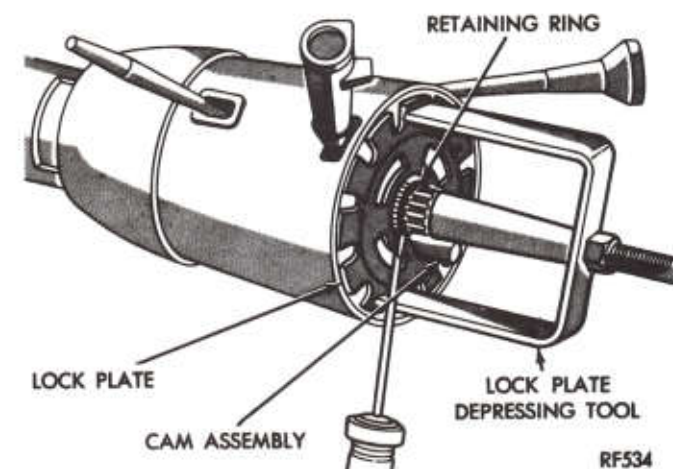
Removing Lock Plate Retaining Ring with Special Tool
